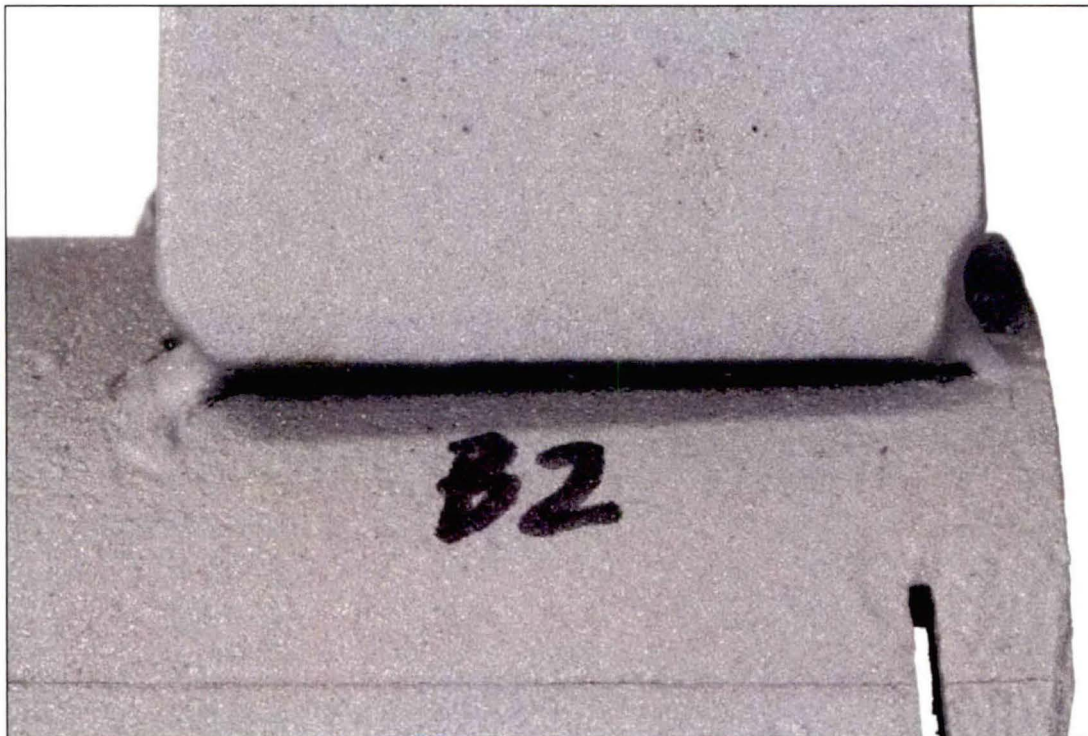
Image of the Lug B2 exterior bottom weld. Joining at the ends of the lug was from welding from the interior surface.
